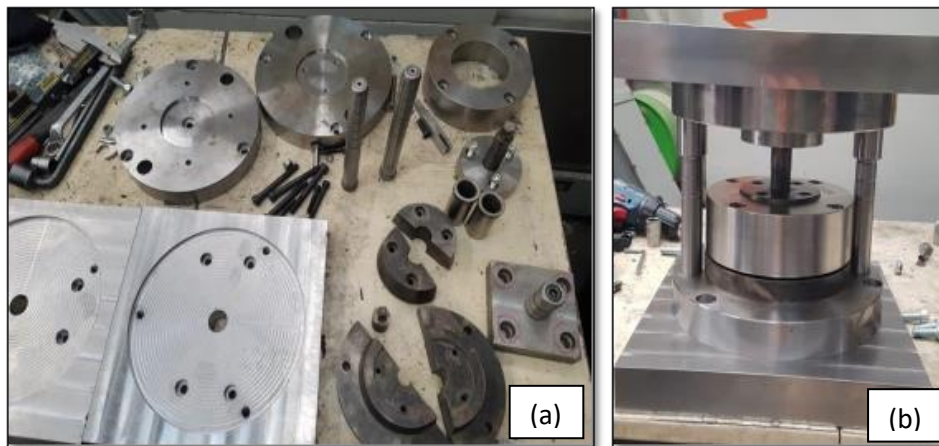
(a) Parts of the combined backward-forward extrusion process and (b) die assembly ((a) Birleşik geri-ileri ekstrüzyon işleminin parçaları ve (b) kalıp montajı)
